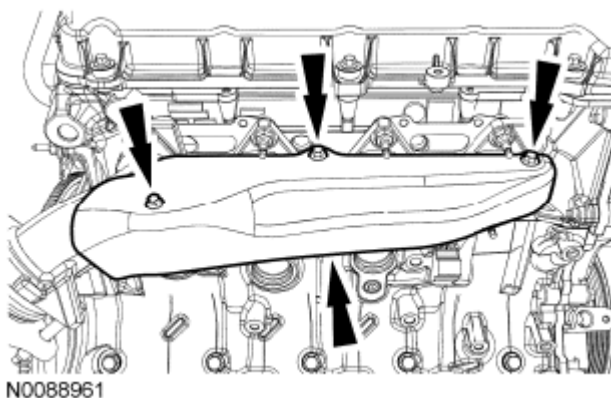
Locating RH Exhaust Manifold Heat Shield And Bolts
